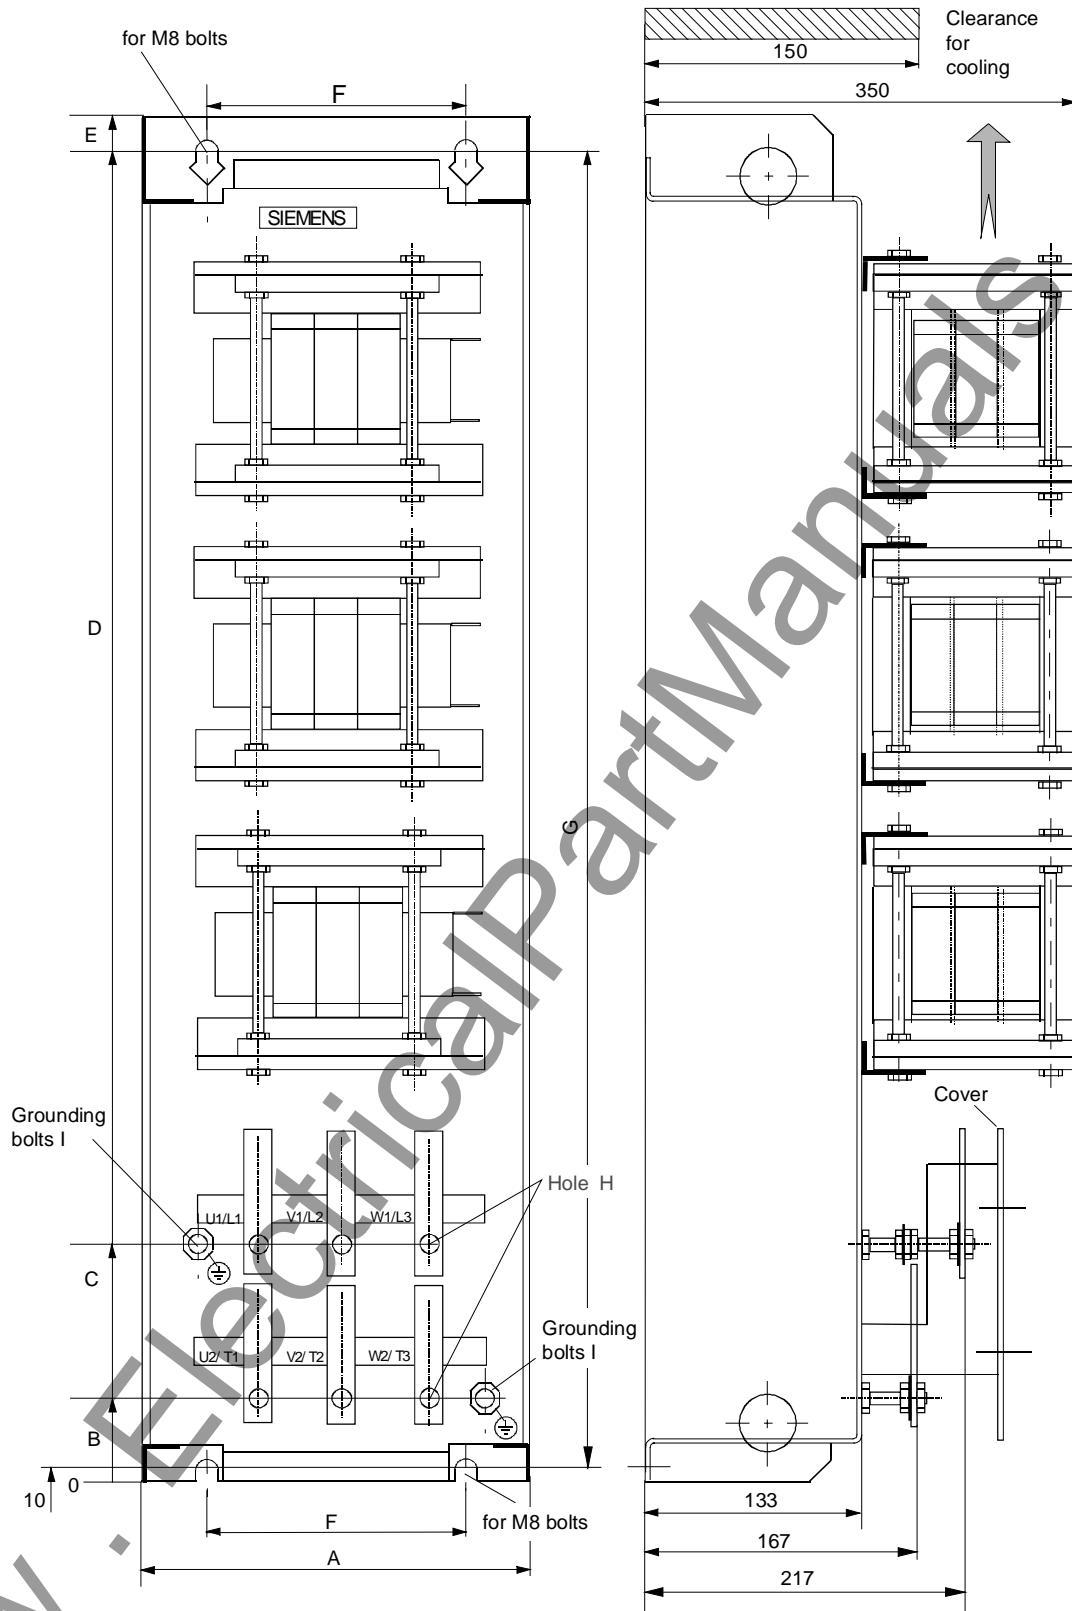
Dimension drawing of sinusoidal filters, size E to G
